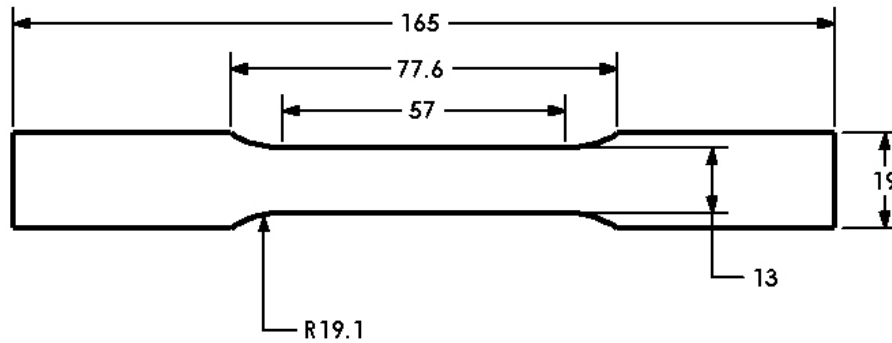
Neat resin tensile specimen dimensions (mm).
